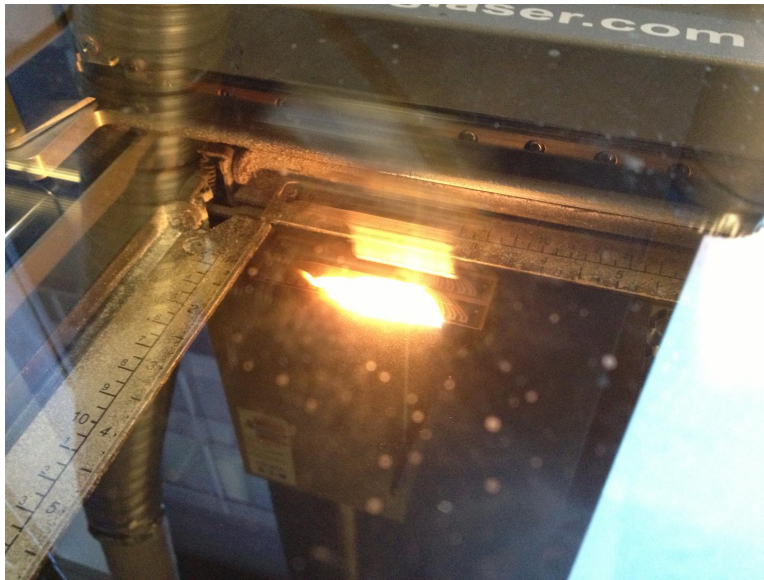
Laser cutter in the process of patterning the spraypaint on the surface of the PCB board.
